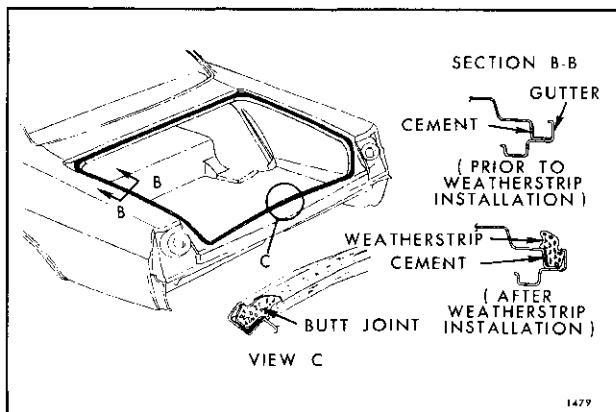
Rear Compartment Weatherstrip Assembly
